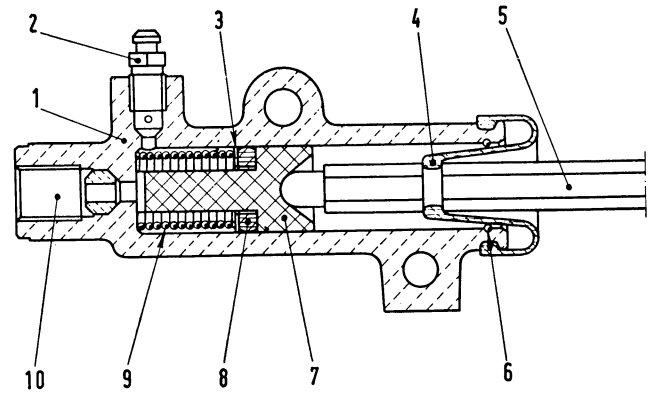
Clutch actuating cylinder (1600 S Cabriolet).
